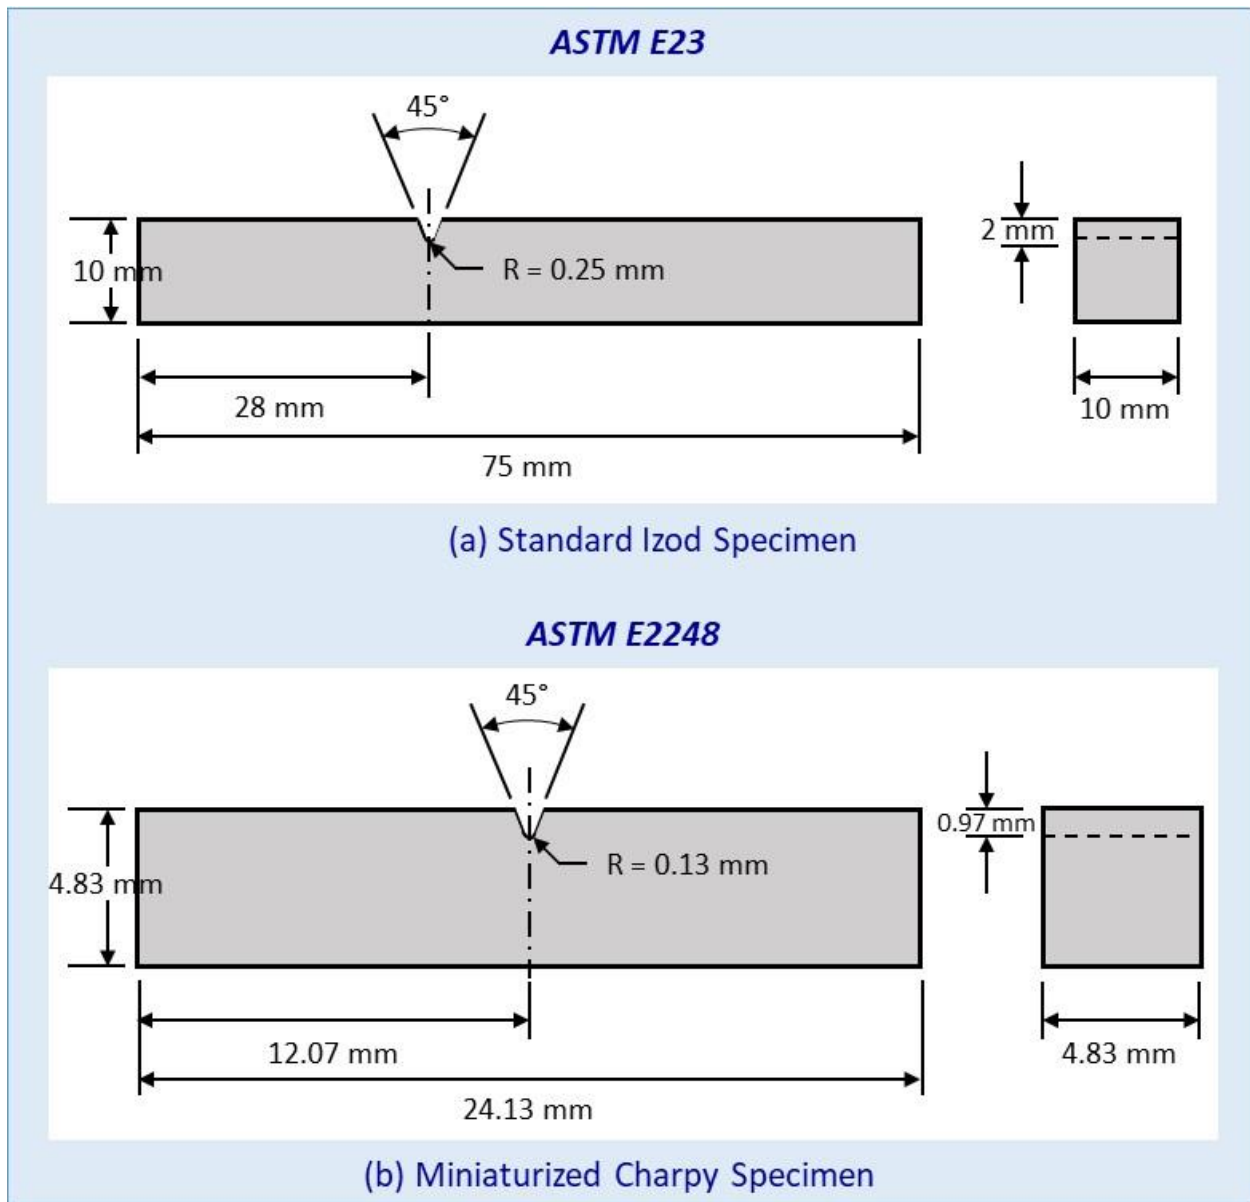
Standard specimen configurations for impact testing [ref. 26]: (a), E23 - standard Izod specimen; (b), E2248 - miniaturized Charpy specimen. Note that this type of test may be more applicable to planetary gears due to section thickness compatibility.
